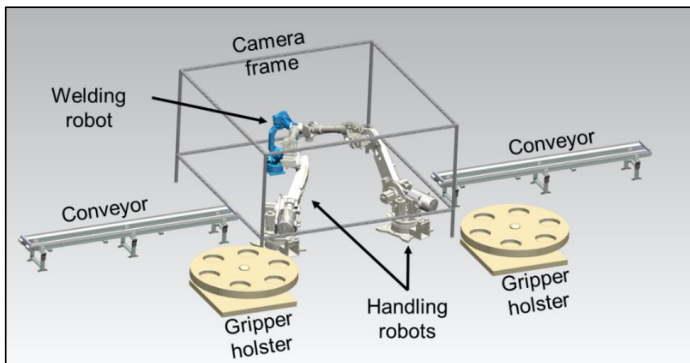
Concept design of a measurement-aided welding cell. (Publ. V)
